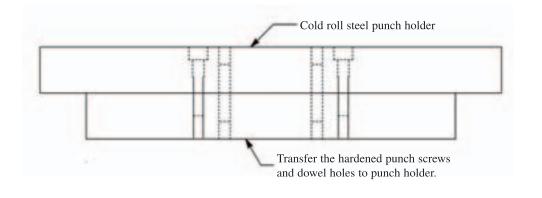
7 Mount Hardened Punch Section The punch section is mounted to the punch holder with screws and dowels.
